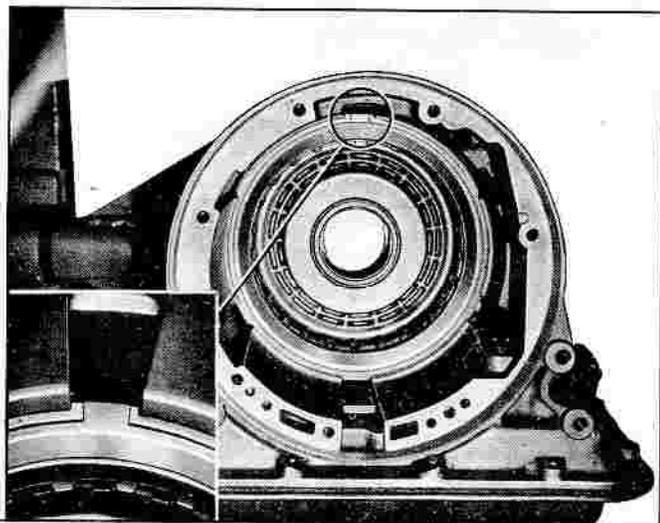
E-52—Reverse Clutch Pack Retaining Ring
